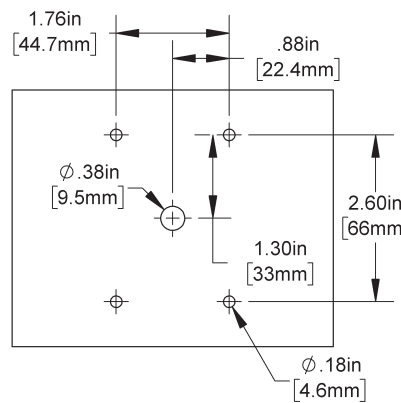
BAPI-Box Crossover Enclosure Mounting Holes
